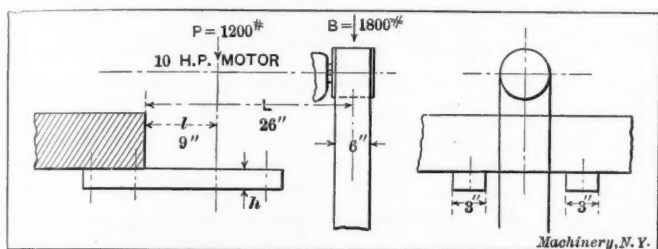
Motor Support made of Machine-steel Bars, as Belt Pull is downward
